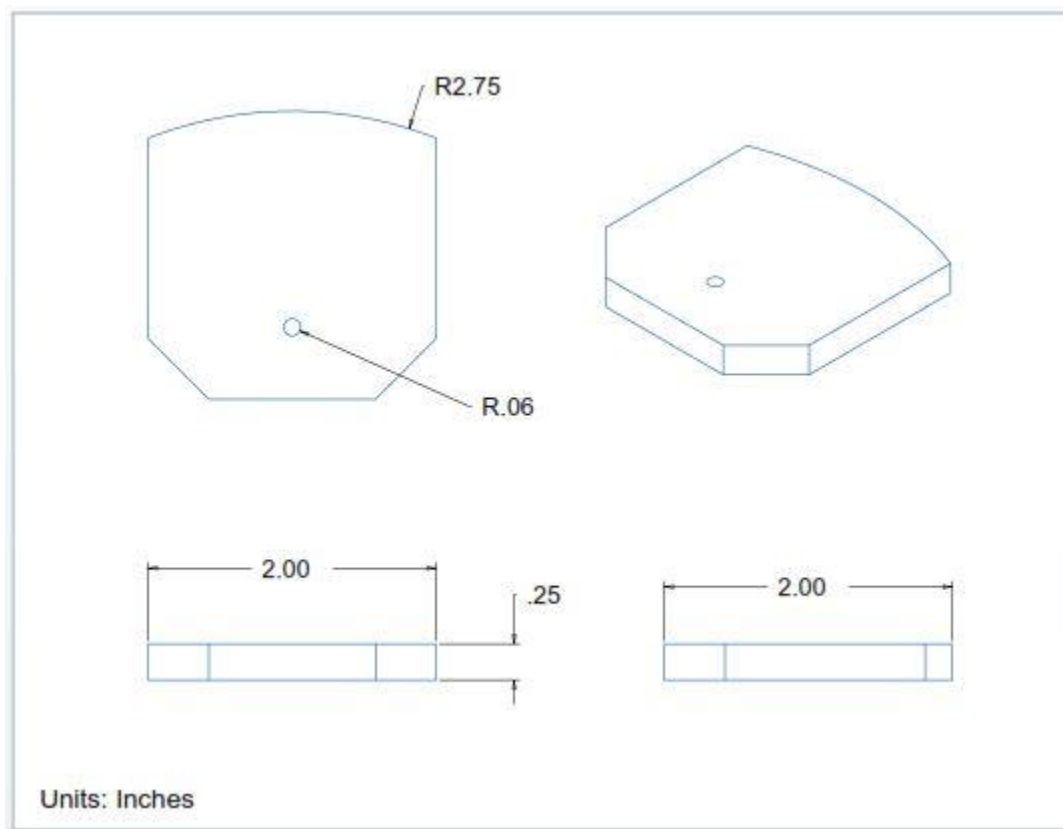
CAD drawing detailing the dimensions of a single drag tab.
